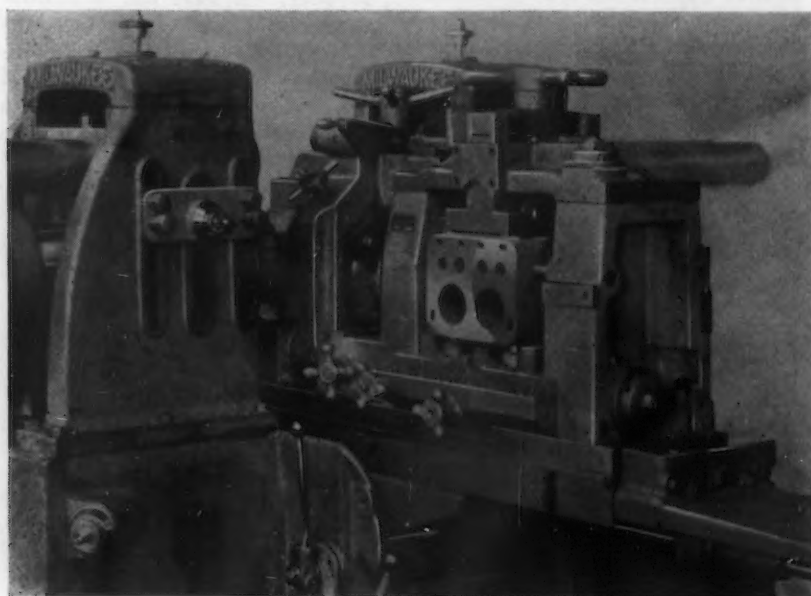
This double fixture holds one cylinder block and one oil pan.. This is the set-up for the first operation. Note massiveness of fixture construction.
